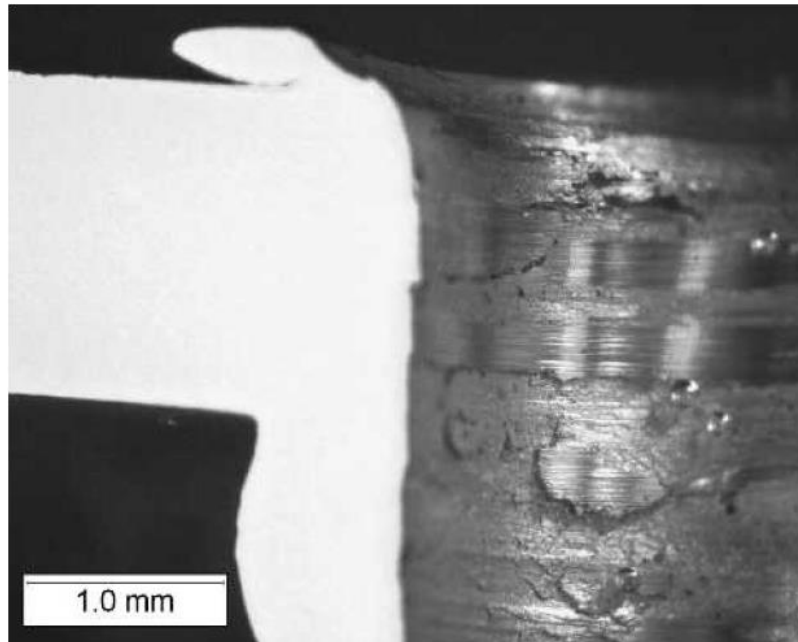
The inside part of the friction drilled hole in Al 5052 metal sheet.
